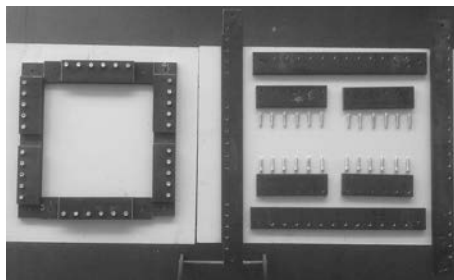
Assembled 500×500 mm, and 1000×1000 mm blank holder parts.
